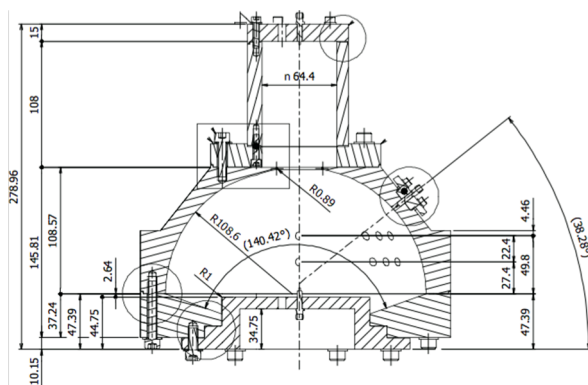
Cross-sectional drawing of mushroom-shaped Al cavity.
